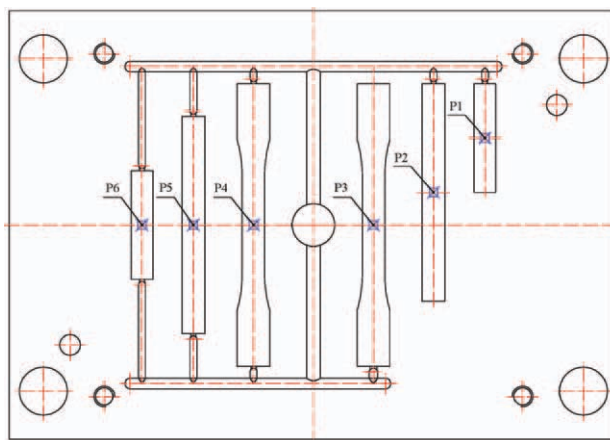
The positions of the thermocouples on cavity surfaces. [Color figure can be viewed in the online issue, which is available at wileyonlinelibrary.com.]
